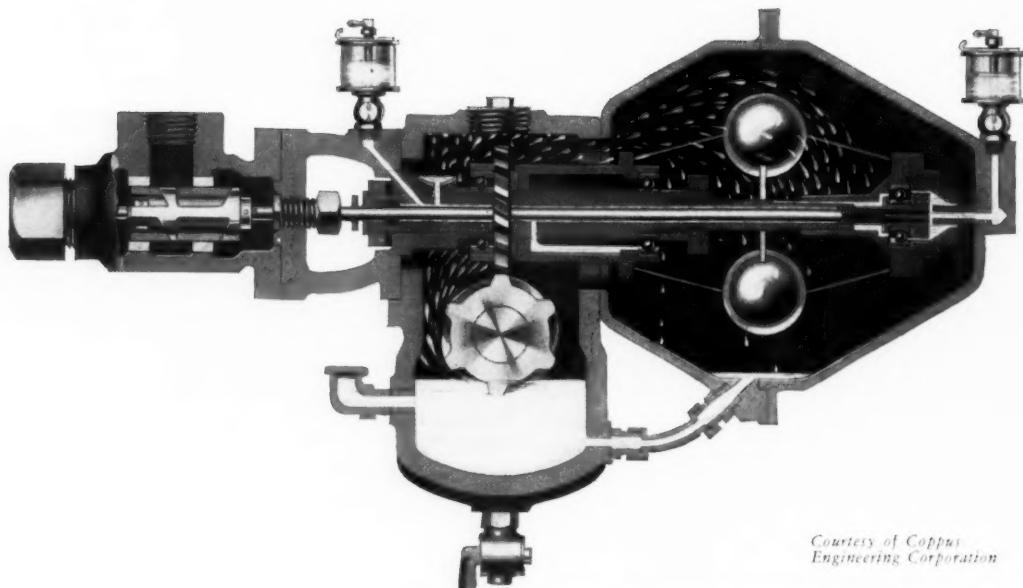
Sectional view of a Coppus turbine governor showing sight feed oil cups and splash lubrication.
